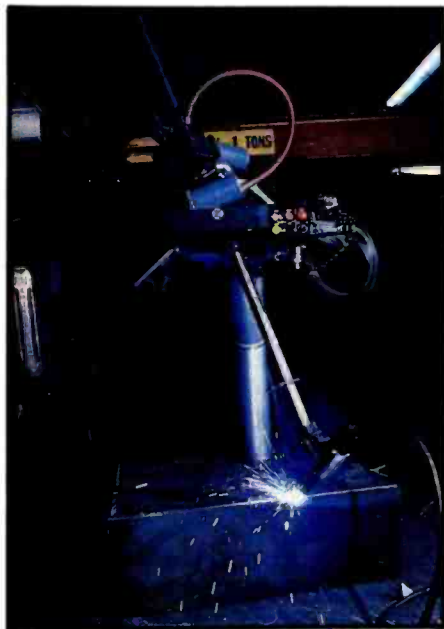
The Apprentice robot in action, welding a steel structure.
